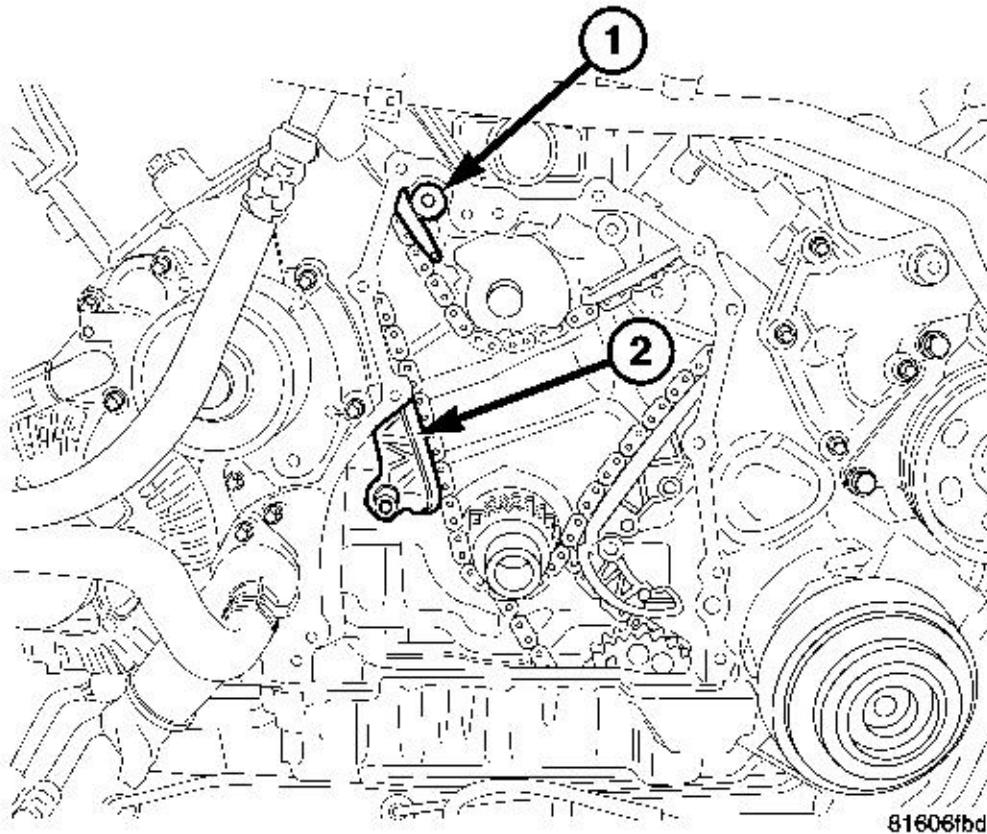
Right Intake Camshaft Drive Gear Alignment Dowel & Vacuum Pump Drive
